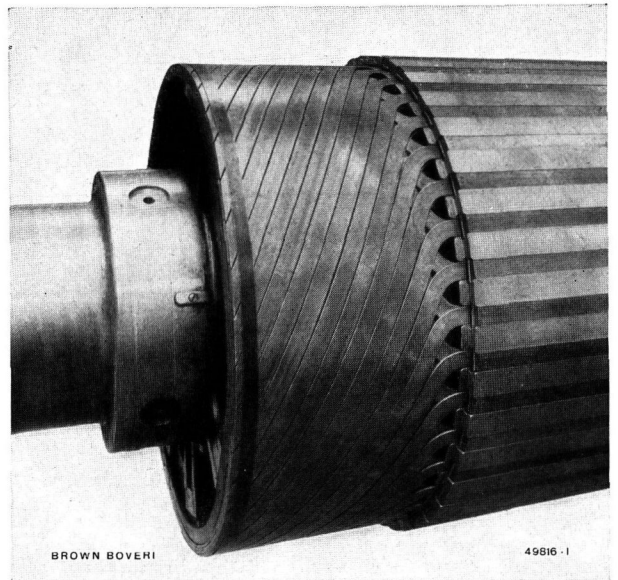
Damping winding in the rotor of a single-phase turbo-generator.
